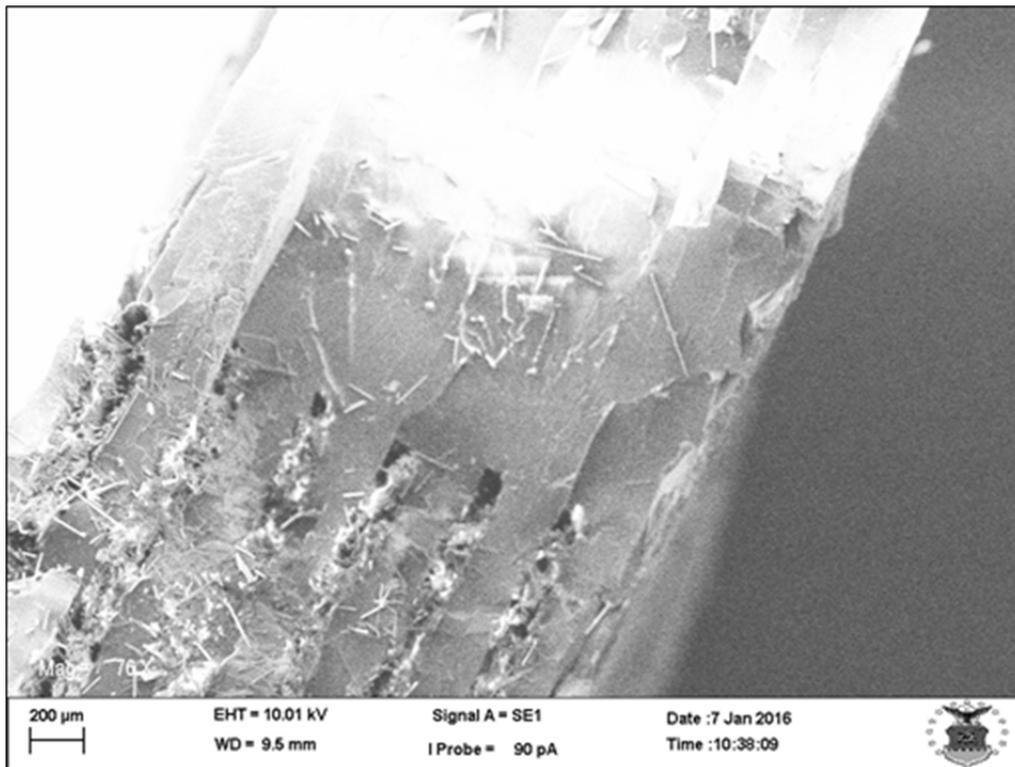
Fracture Surface of Carbon-Fiber Reinforced Nylon Composite
